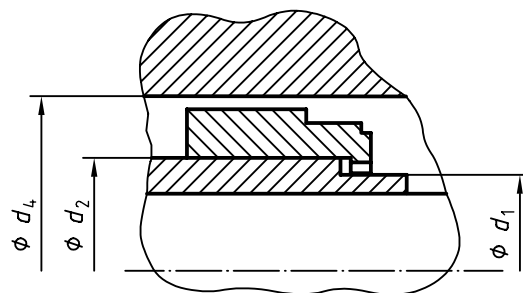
Step-balanced mechanical seal with an extended sleeve
